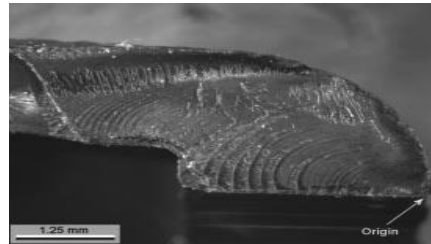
Fatigue striations emanating from fracture origin of polycarbonate latch handle. [3]
